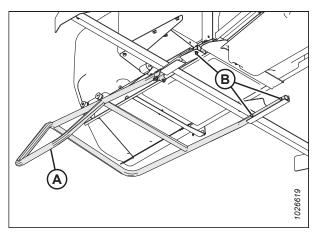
Handrail under Fuel Tank Shipping Assembly
